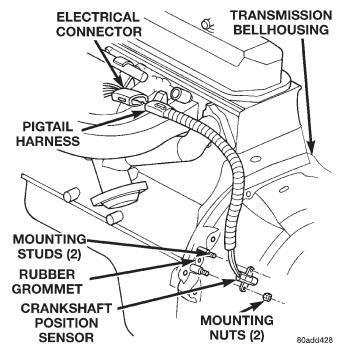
Crankshaft Position Sensor—2.5L 4-Cyl. Engine—Auto. Trans.
